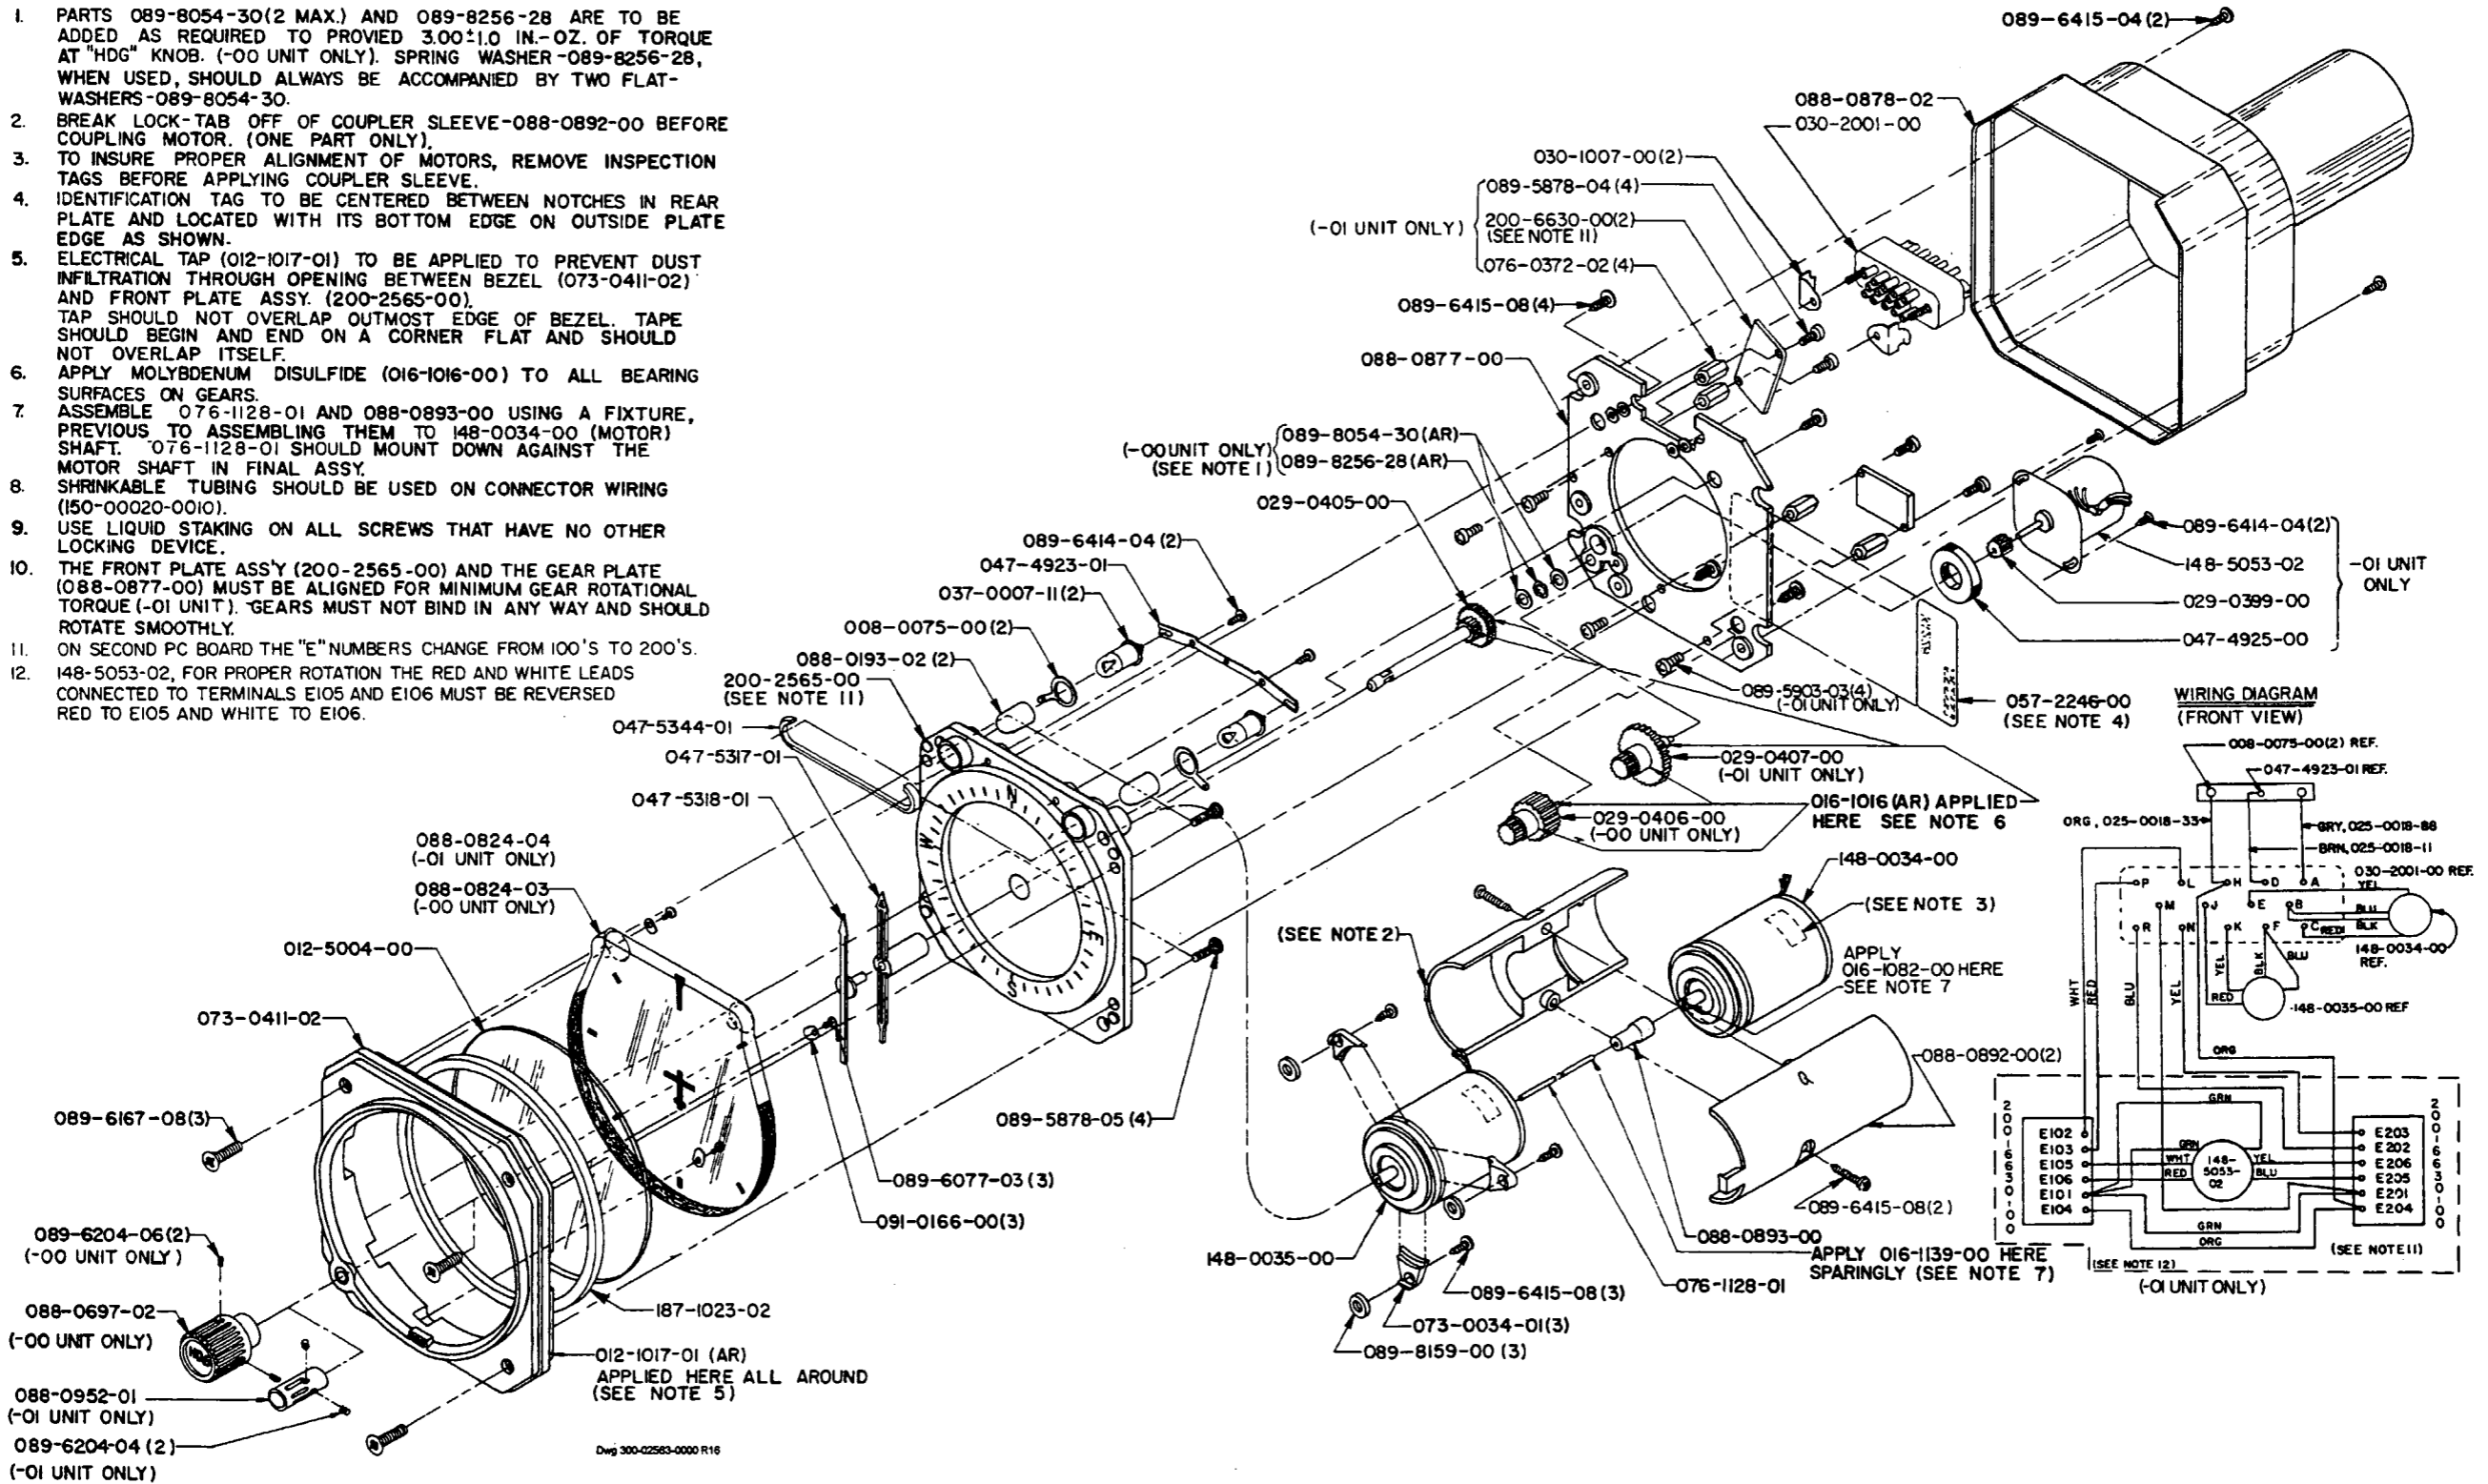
KI 228 FINAL ASSEMBLY
